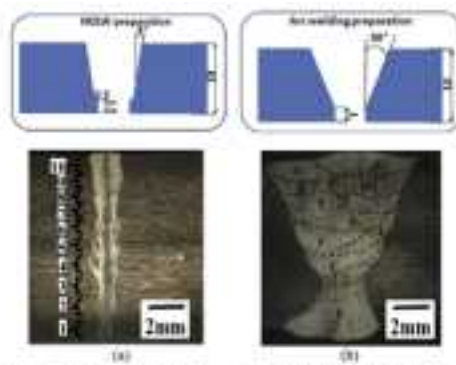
Joint preparation and weld bead profile for laser and TIG welding. (a) Laser and (b) TIG welding. All dimensions in mm.
